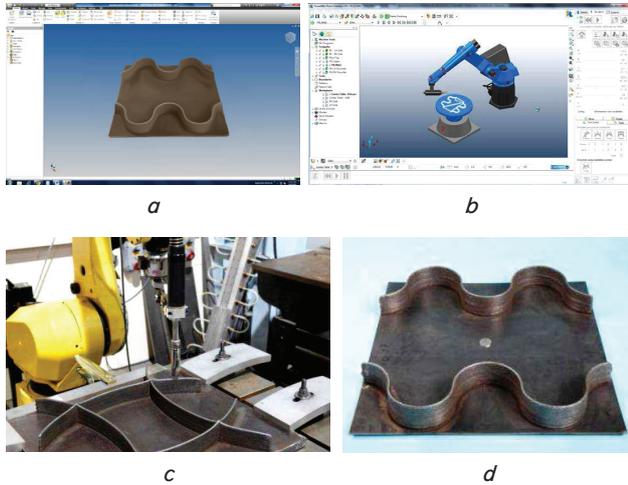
Technological process of 3D-printing of three-dimensional metal products with application of the Wire-Arc Additive Manufacturing method [17]: *a* – computer modeling of the part; *b* – software for 3D-positioner or robot with integrated welding equipment; *c* – robotized complex with welding installation; *d* – finished part
